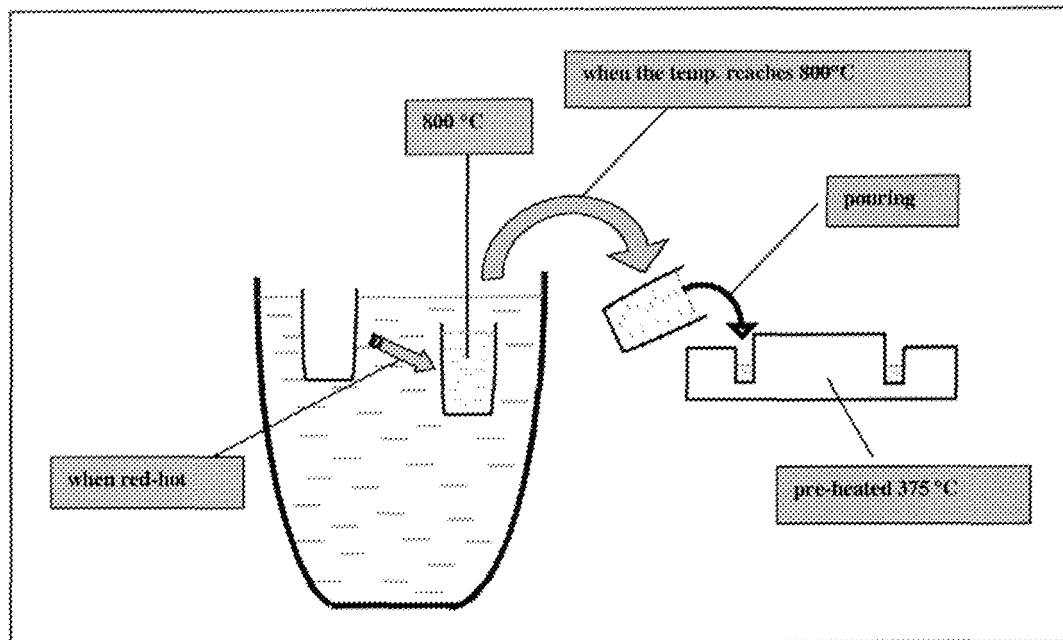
a) Schematic illustrating the method of melting and casting.
